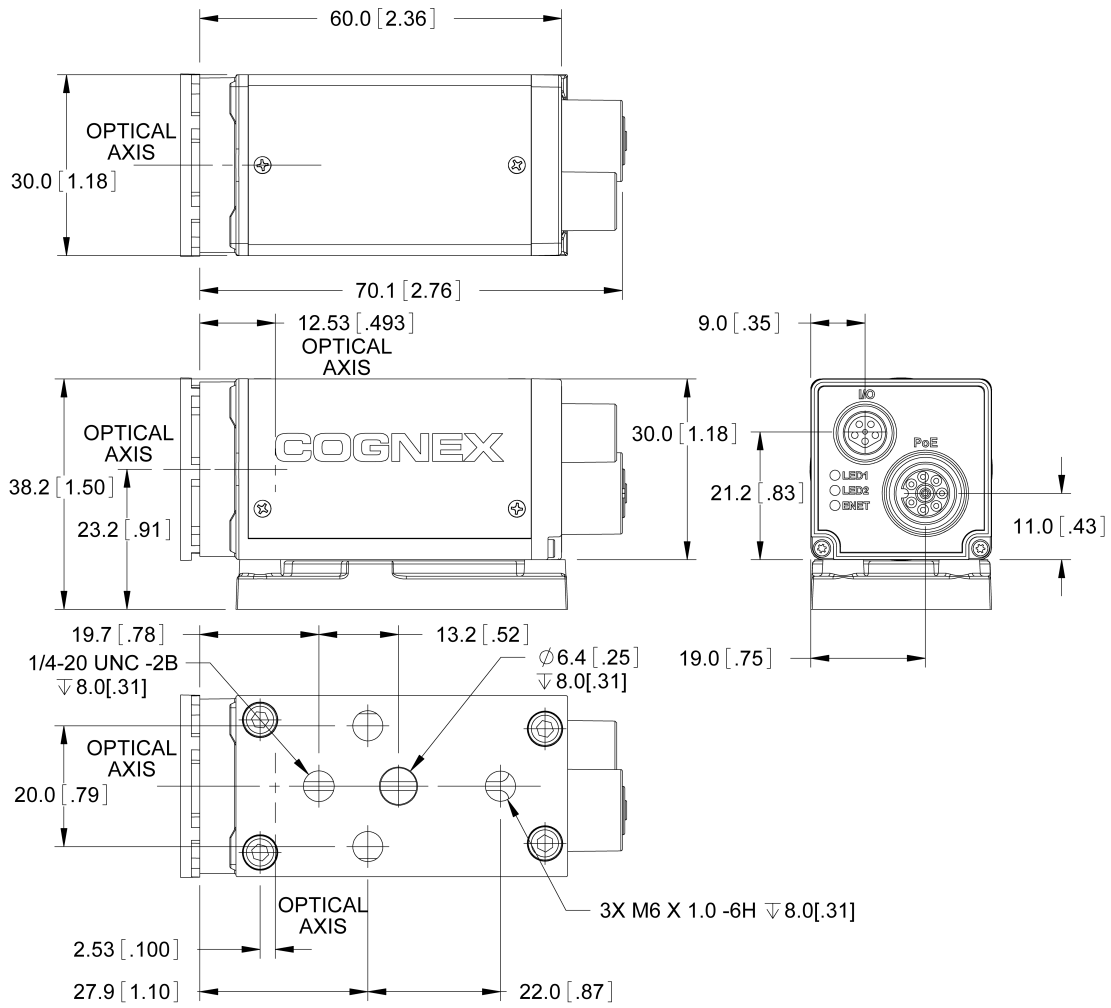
In-Sight Micro Vision System Dimensions (with Mounting Block)
